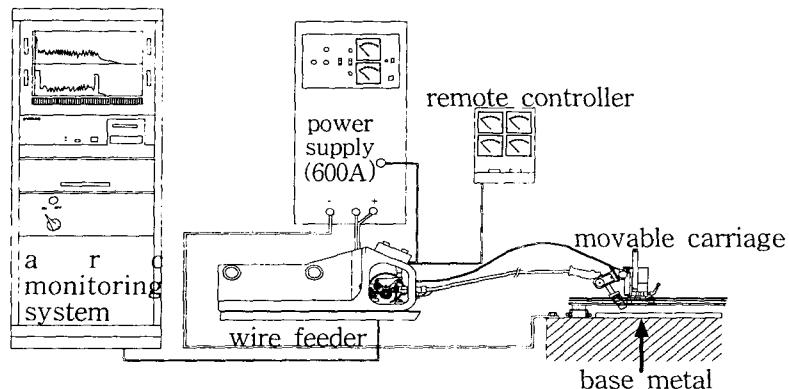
Arrangement of welding system with Arc Monitoring equipment
